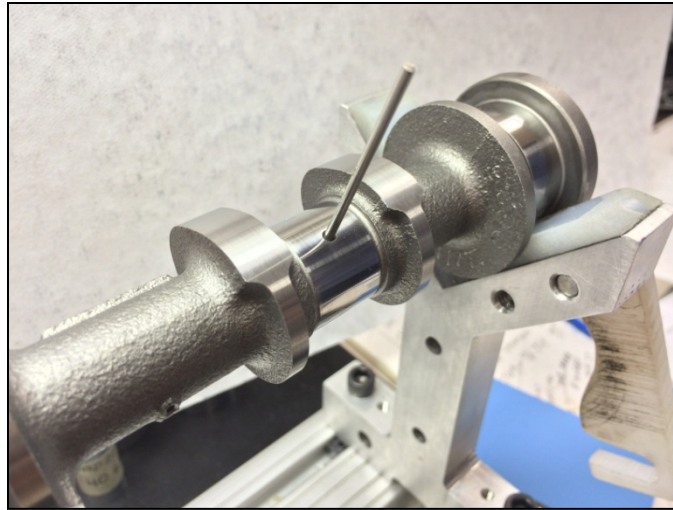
Measuring Oil Feed Hole Diameters Using a Pin Gage
